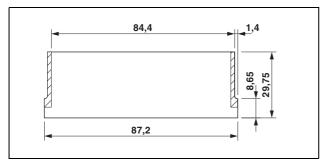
Dimensions of the PCB with housing cover ME-IO 18,8 C 8U 7035
